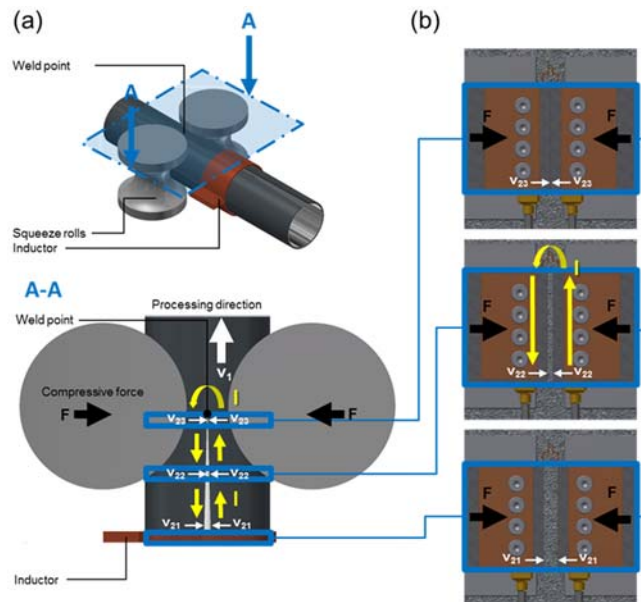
Schematic illustration and working principle tube welding setup (a) and ETM-simulator (b).
